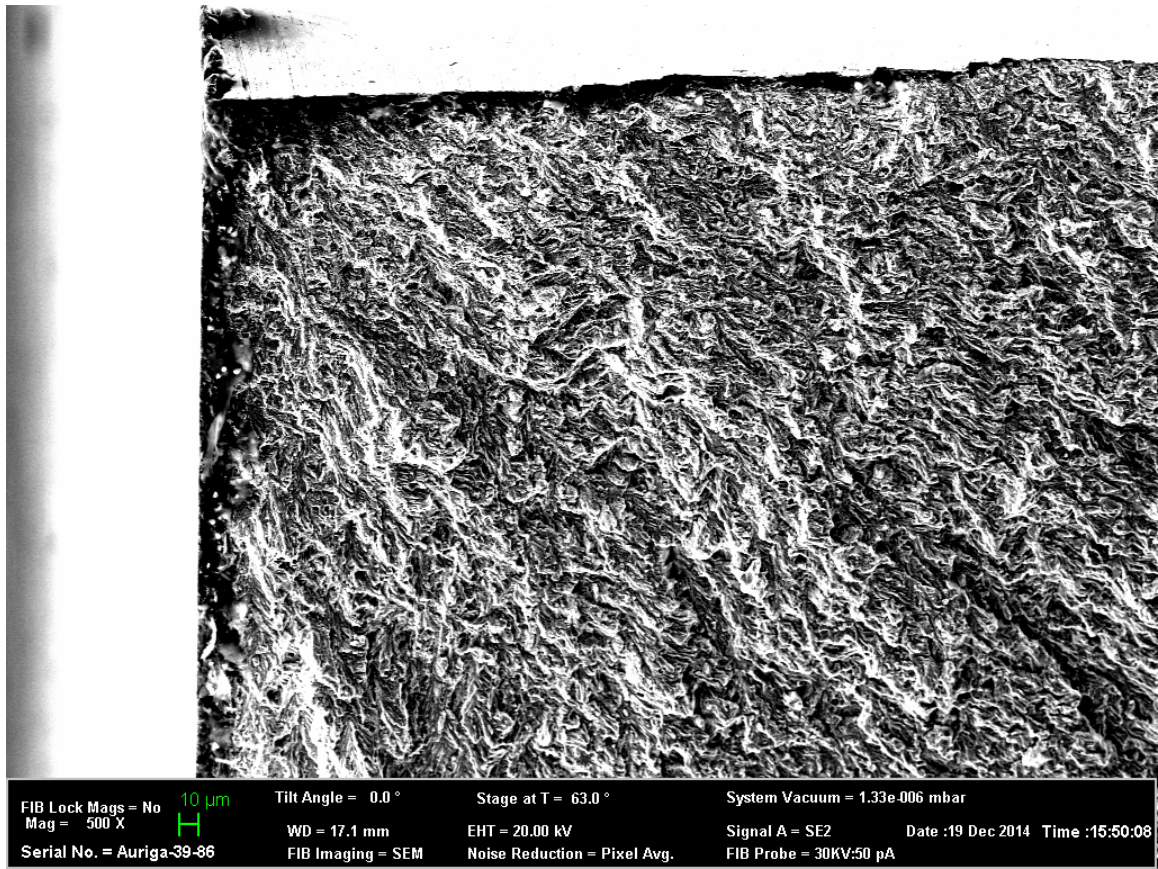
Fracture surface of an X70 weld four point bending fatigue sample (crack initiation and growth regions)
